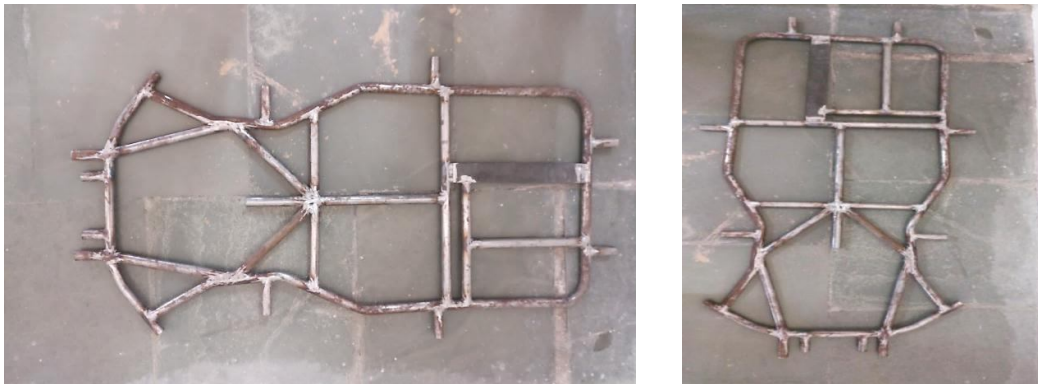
Chassis of Go-kart (mild steel material with 1 inch inner diameter. circular pipe using mild steel welding)
